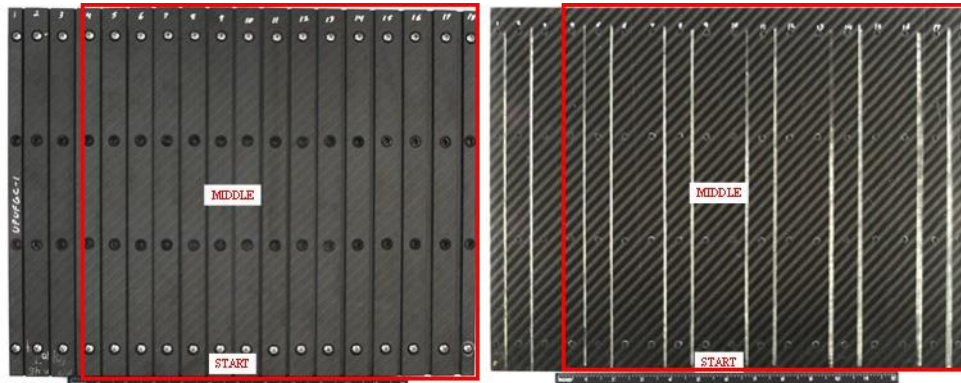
UPUFGC-1 Test Panel Pretest and Posttest (Disassembled)
